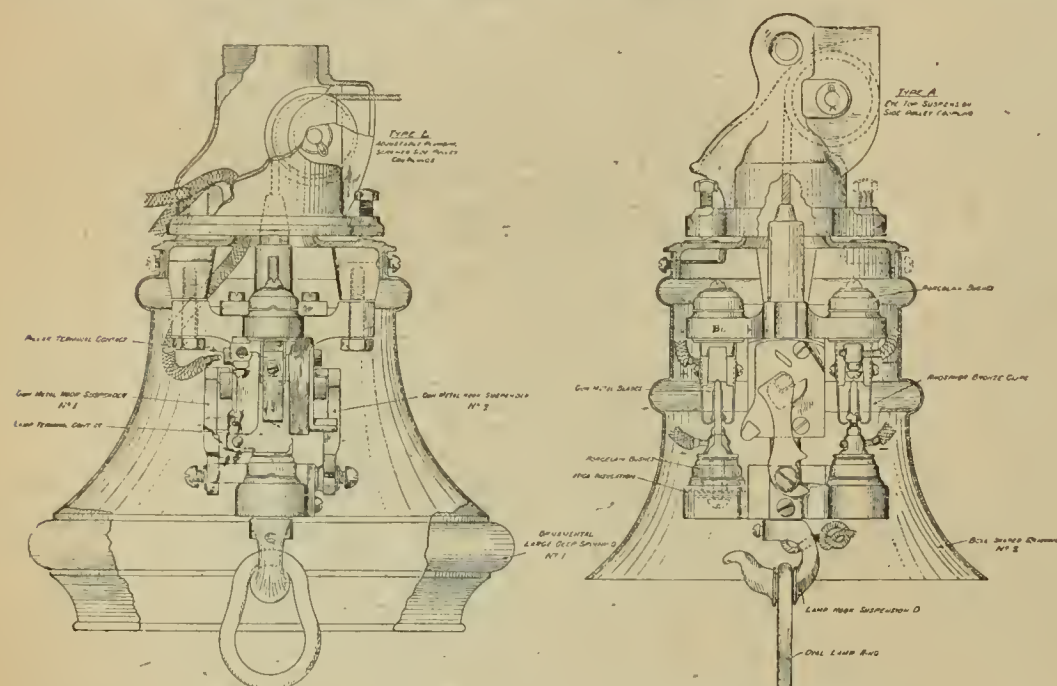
AUTOMATIC CONTACT SUSPENSION GEAR.
